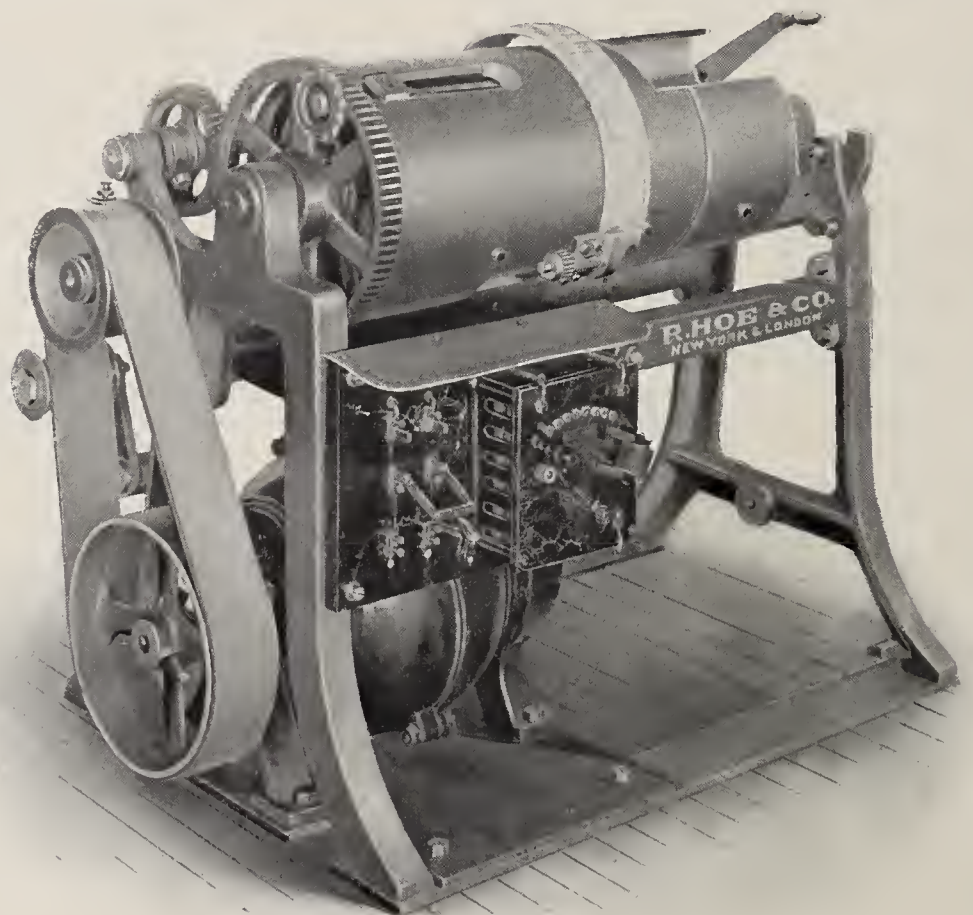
A STEREOTYPE PLATE TRIMMING MACHINE DRIVEN BY A SPRAGUE MOTOR
